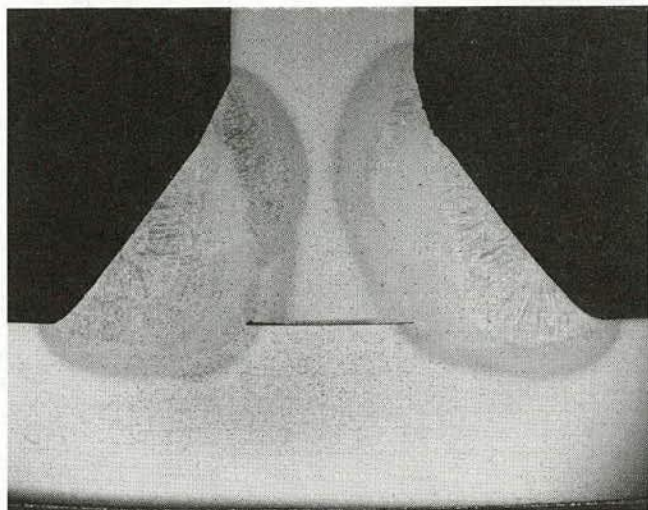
Macrosection of fillet weld soundness test for weld W96, underwater oxygen plasma-cut edge on Grade 50W plate, 12.7 mm ($1/2$ in.) thick, welded by SAW. Original mag. $\times 2.5$; as shown $\times 1.75$.
